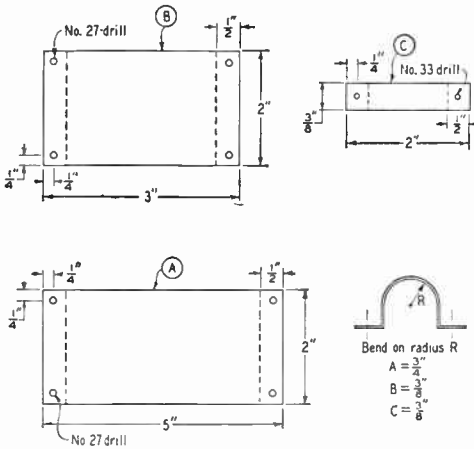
Detail drawings of the clamps used to assemble the all-metal 2-meter array. A, B and C are before bending into “U” shape. The right-angle bends should be made first, along the dotted lines as shown, then the plates may be bent around a piece of pipe of the proper diameter. Sheet stock should be 1/16-inch or heavier aluminum.
